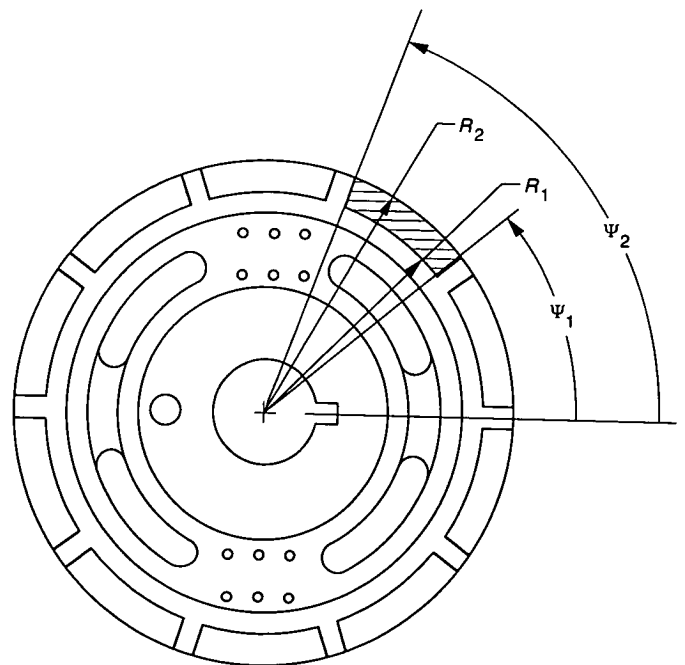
One region of fluid shear stress acting between the valve plate to motor cylinder block interface.
